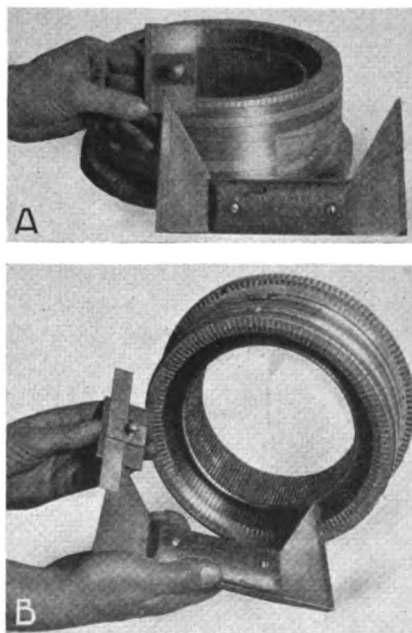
CHECKING THE ACCURACY OF THE GAGE DIAMETER
